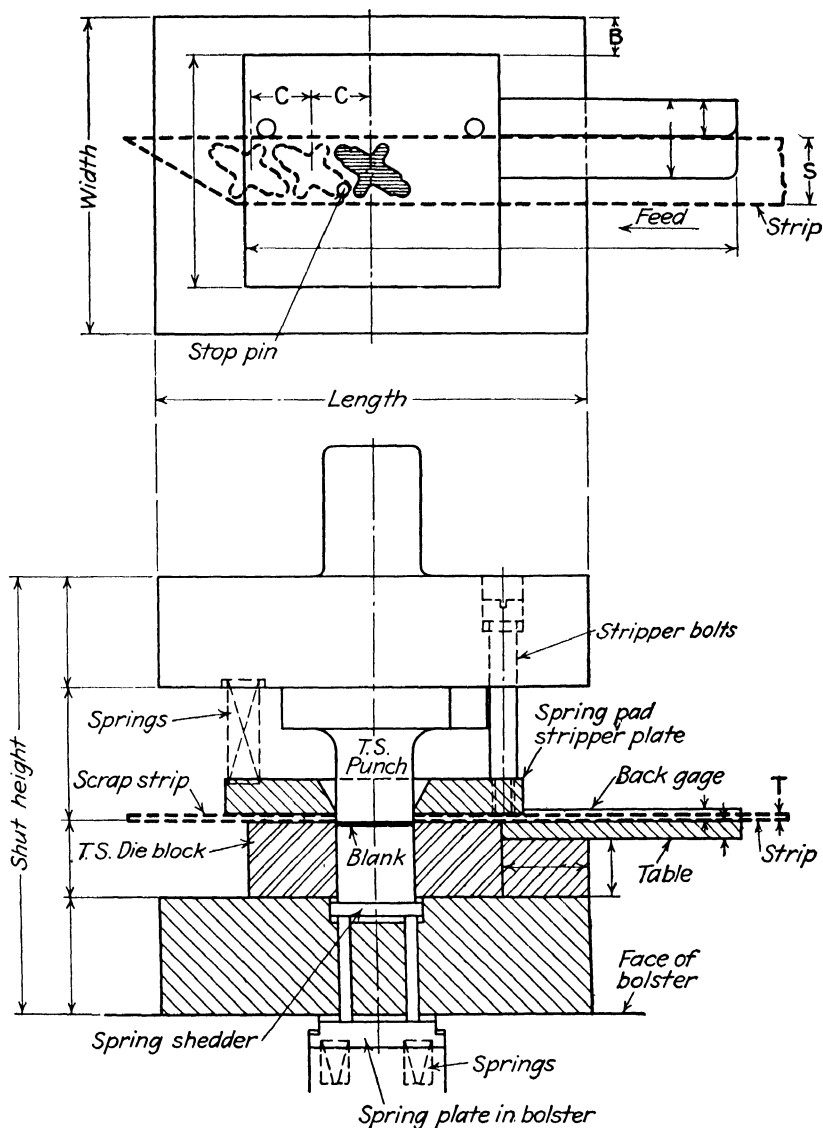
Blanking punch and die that cuts a single row of blanks. When the punch ascends, the spring pad follows up with the blank and inserts the blank flush within the opening of the strip whence it came.
